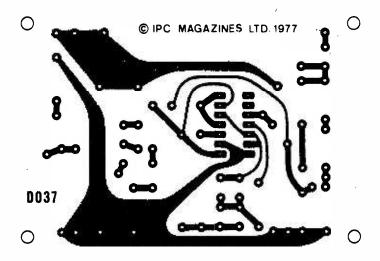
Foil pattern of the printed circuit board, shown here actual size.
